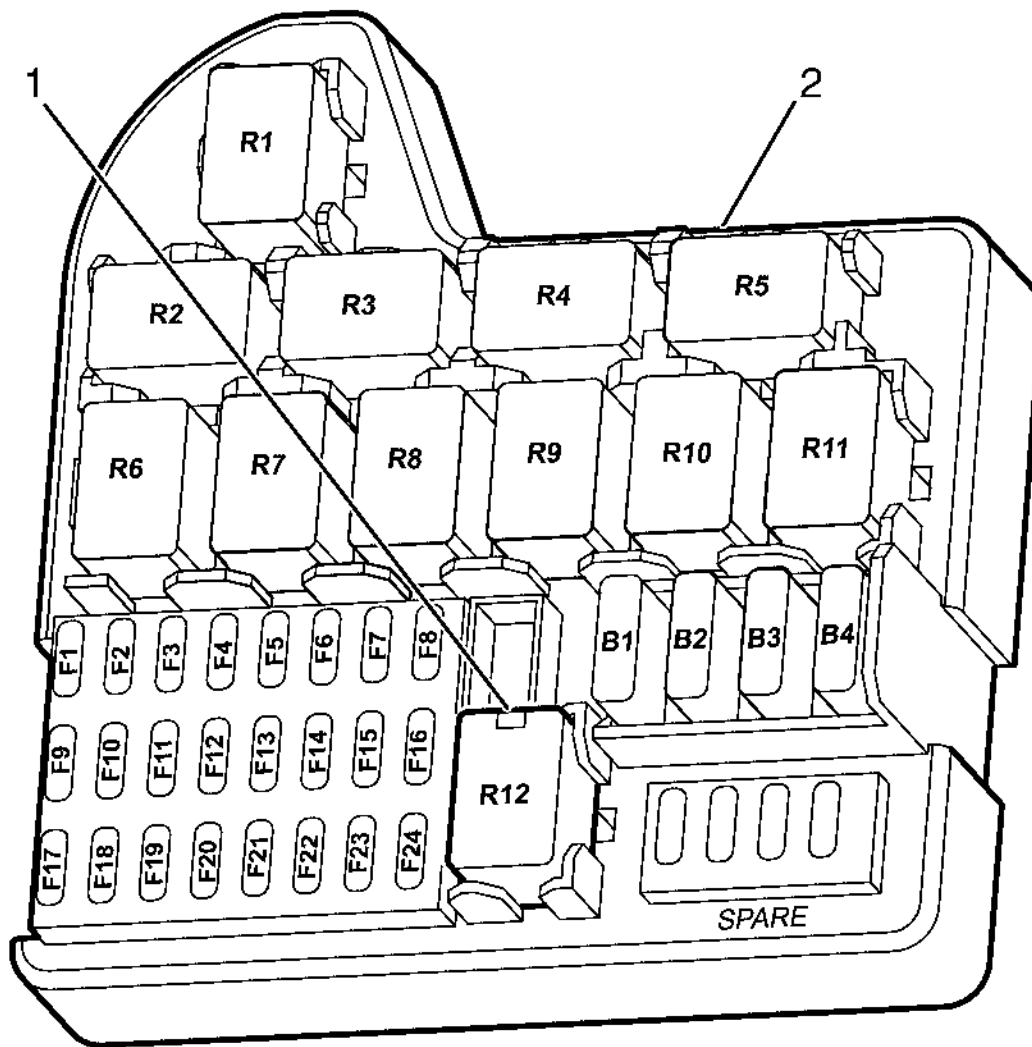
Identifying Fuel Pump Relay & Instrument Panel Fuse Block
